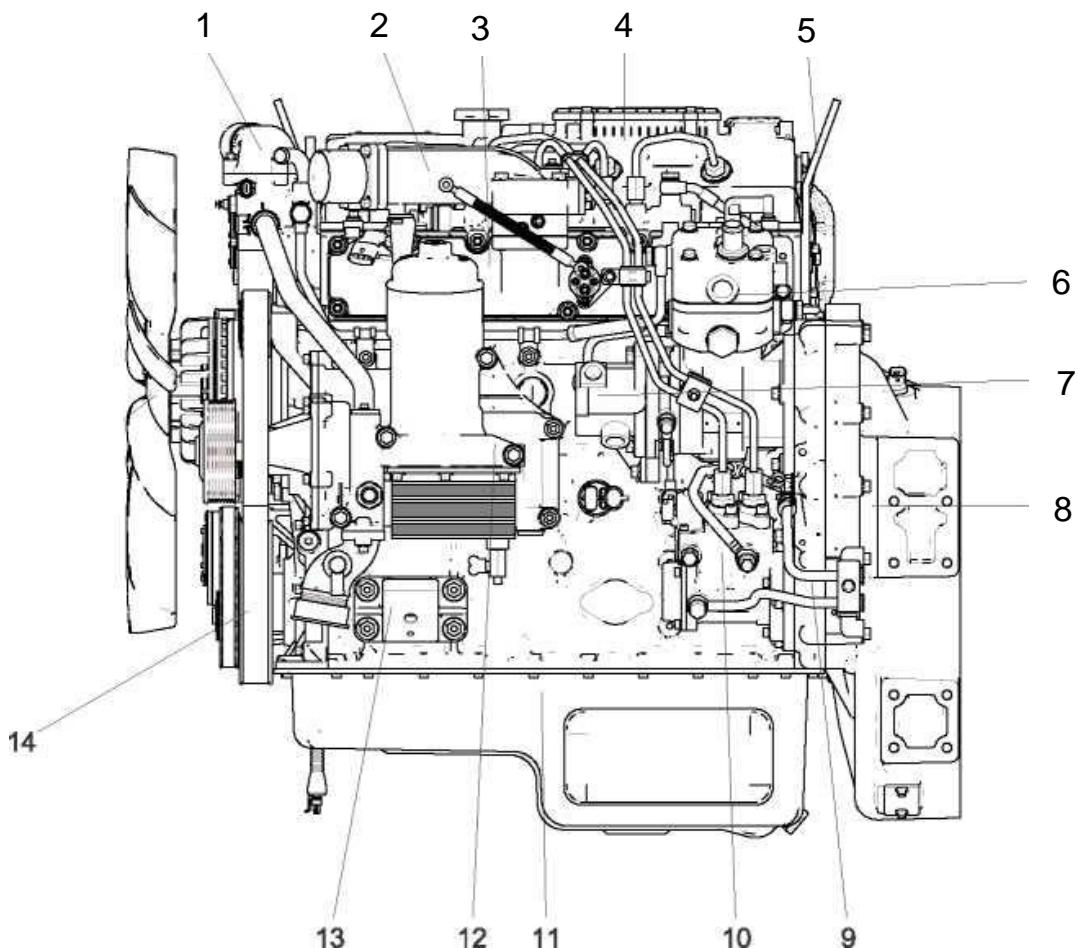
Drawing of the external construction of Euro IV standard WP4 electronic oil pump diesel engine
